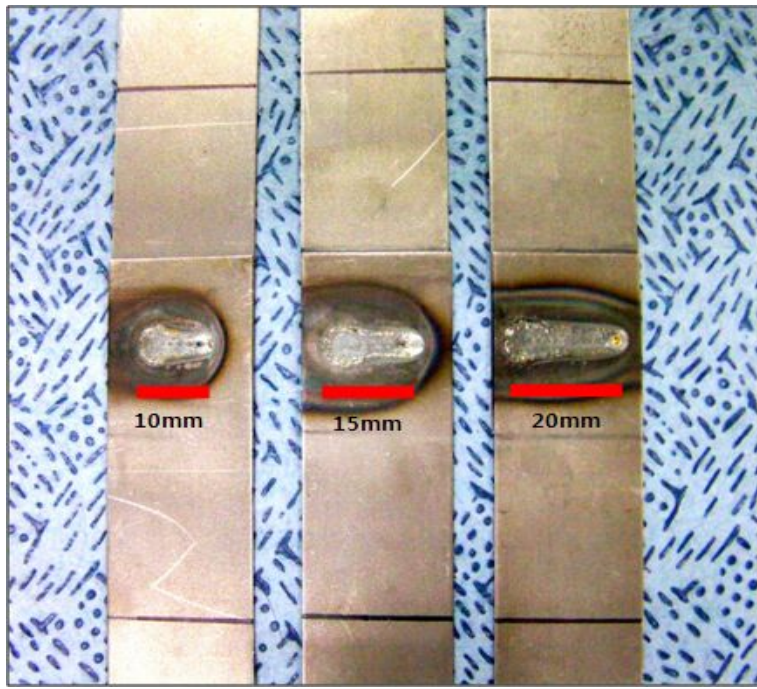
Result of Nd:YAG Laser Stitch Welding of Bead-Size
